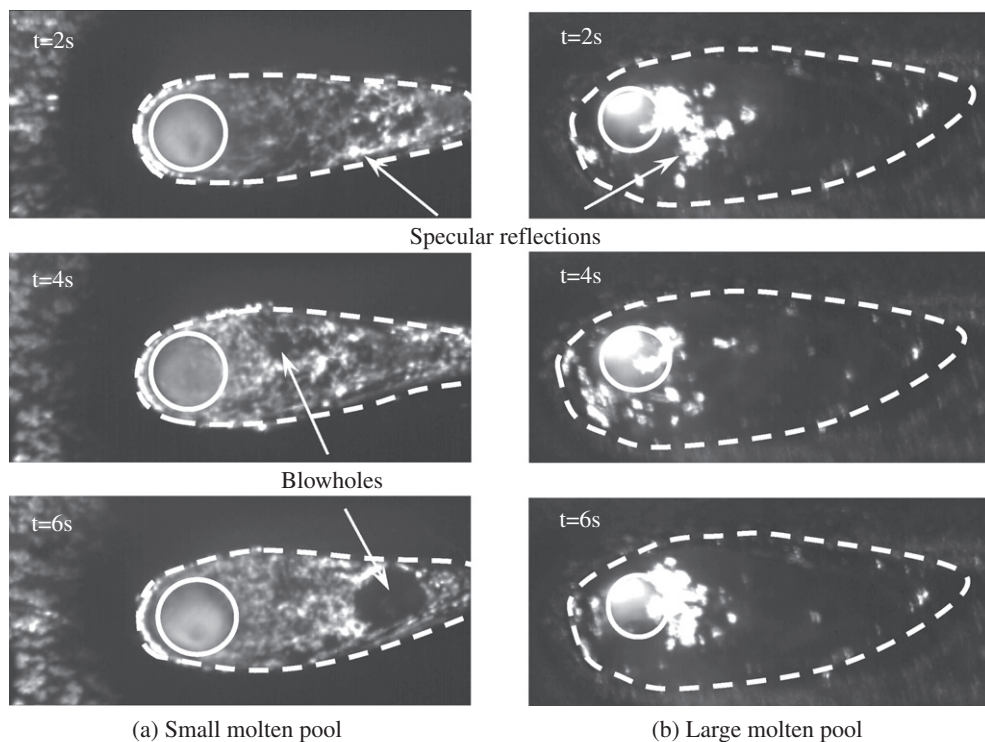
The dynamic behavior of the molten pool acquired under different welding parameters: (a) laser power of 4.0 kW, welding speed of 30 mm/s, and (b) laser power of 2.0 kW, welding speed of 5 mm/s at different time steps during the welding process.
